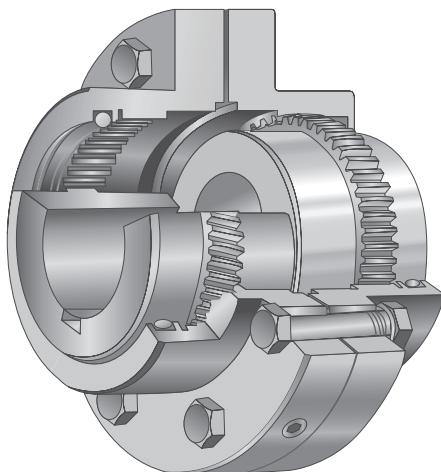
Gear coupling. Torque is transmitted between crown-hobbed teeth from the coupling half to the sleeve. The crown shape on the gear teeth permits misalignment
